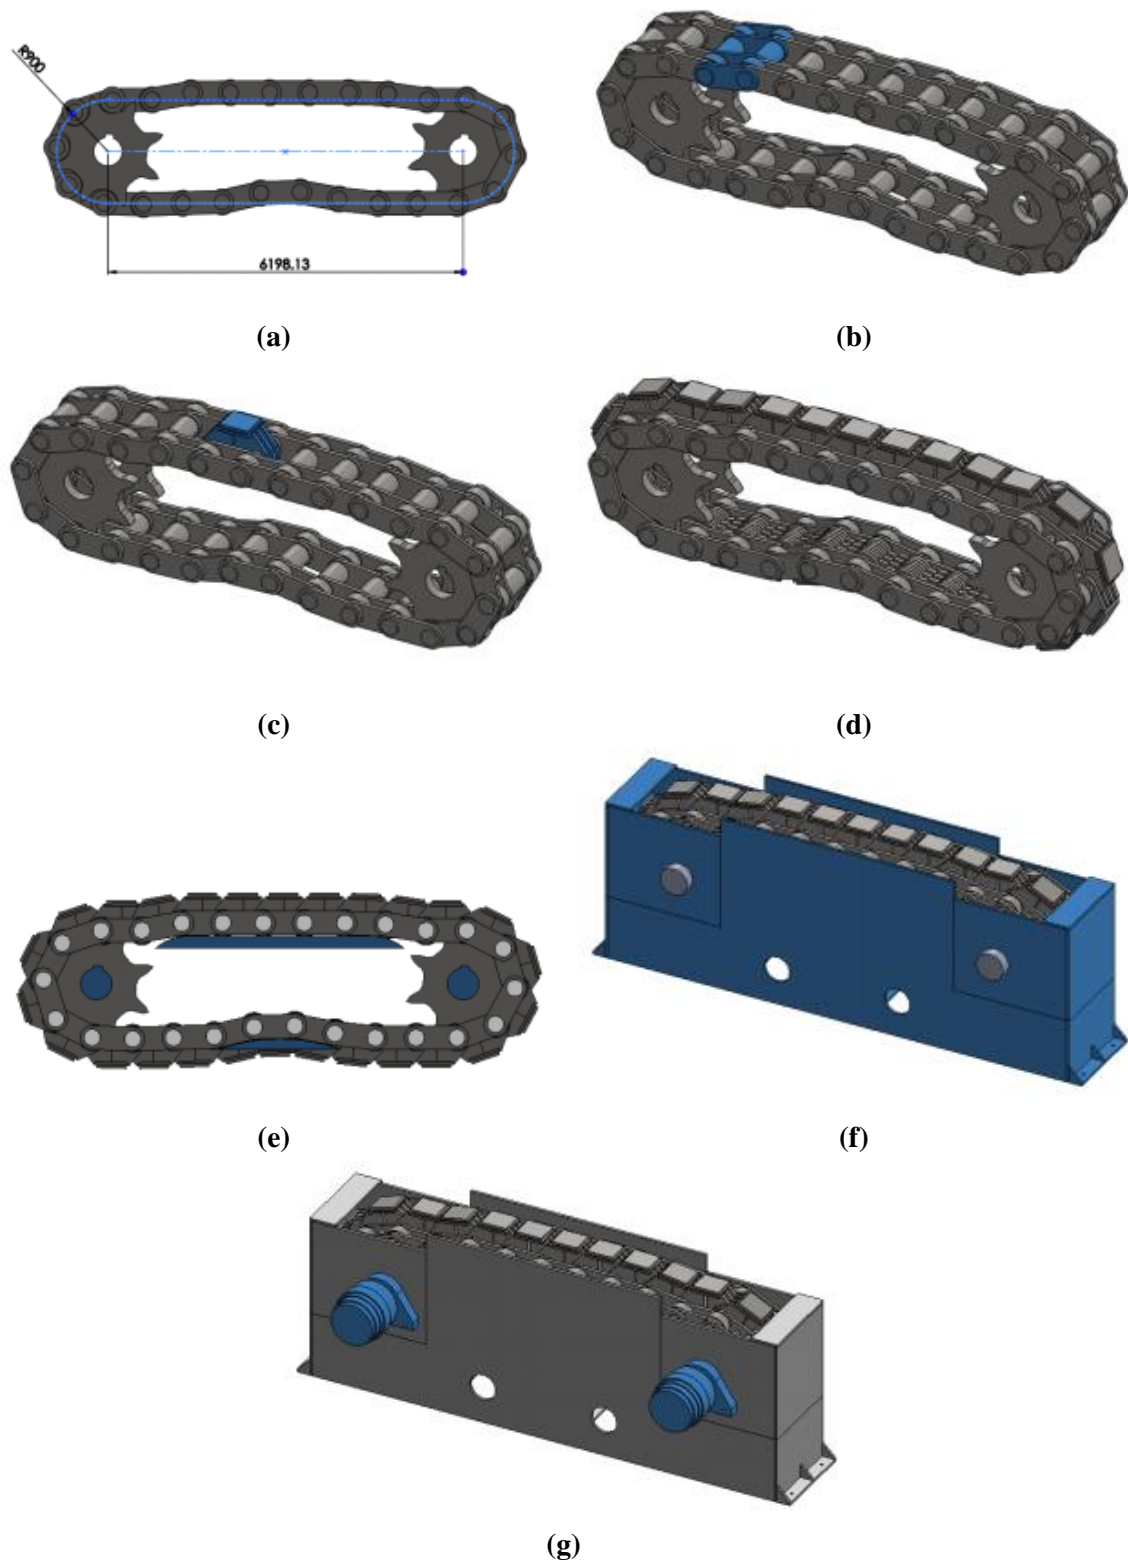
Procedure of design of tridimensional geometric model of mechanism: (a) initial sketch; (b) pattern of chain of transmission; (c) closed chains; (d) roller rails; chain tightener and gear shafts; (e) external chase; (f) engines and bearing supports.
